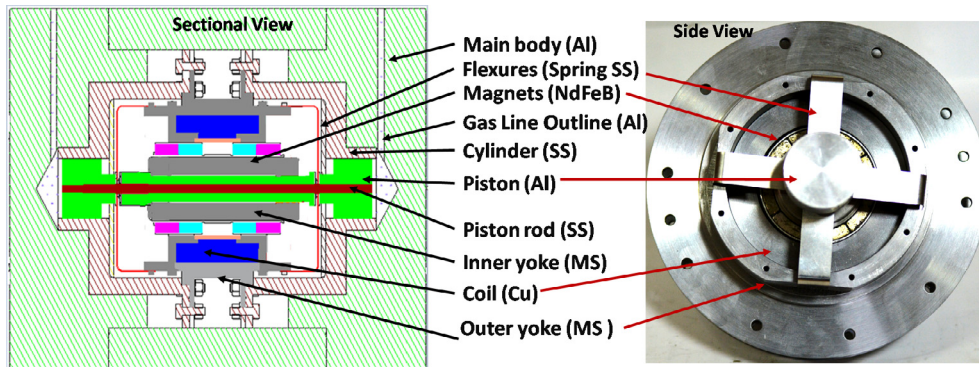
Schematic of linear motor compressor components; magnets, coil, outer yoke, inner yoke, piston rod, piston heads, flexures and end caps.
